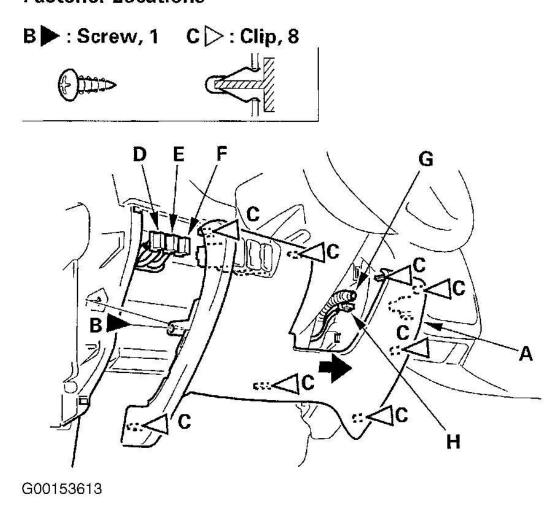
Removing Dashboard Lower Cover Courtesy of AMERICAN HONDA MOTOR CO., INC.
